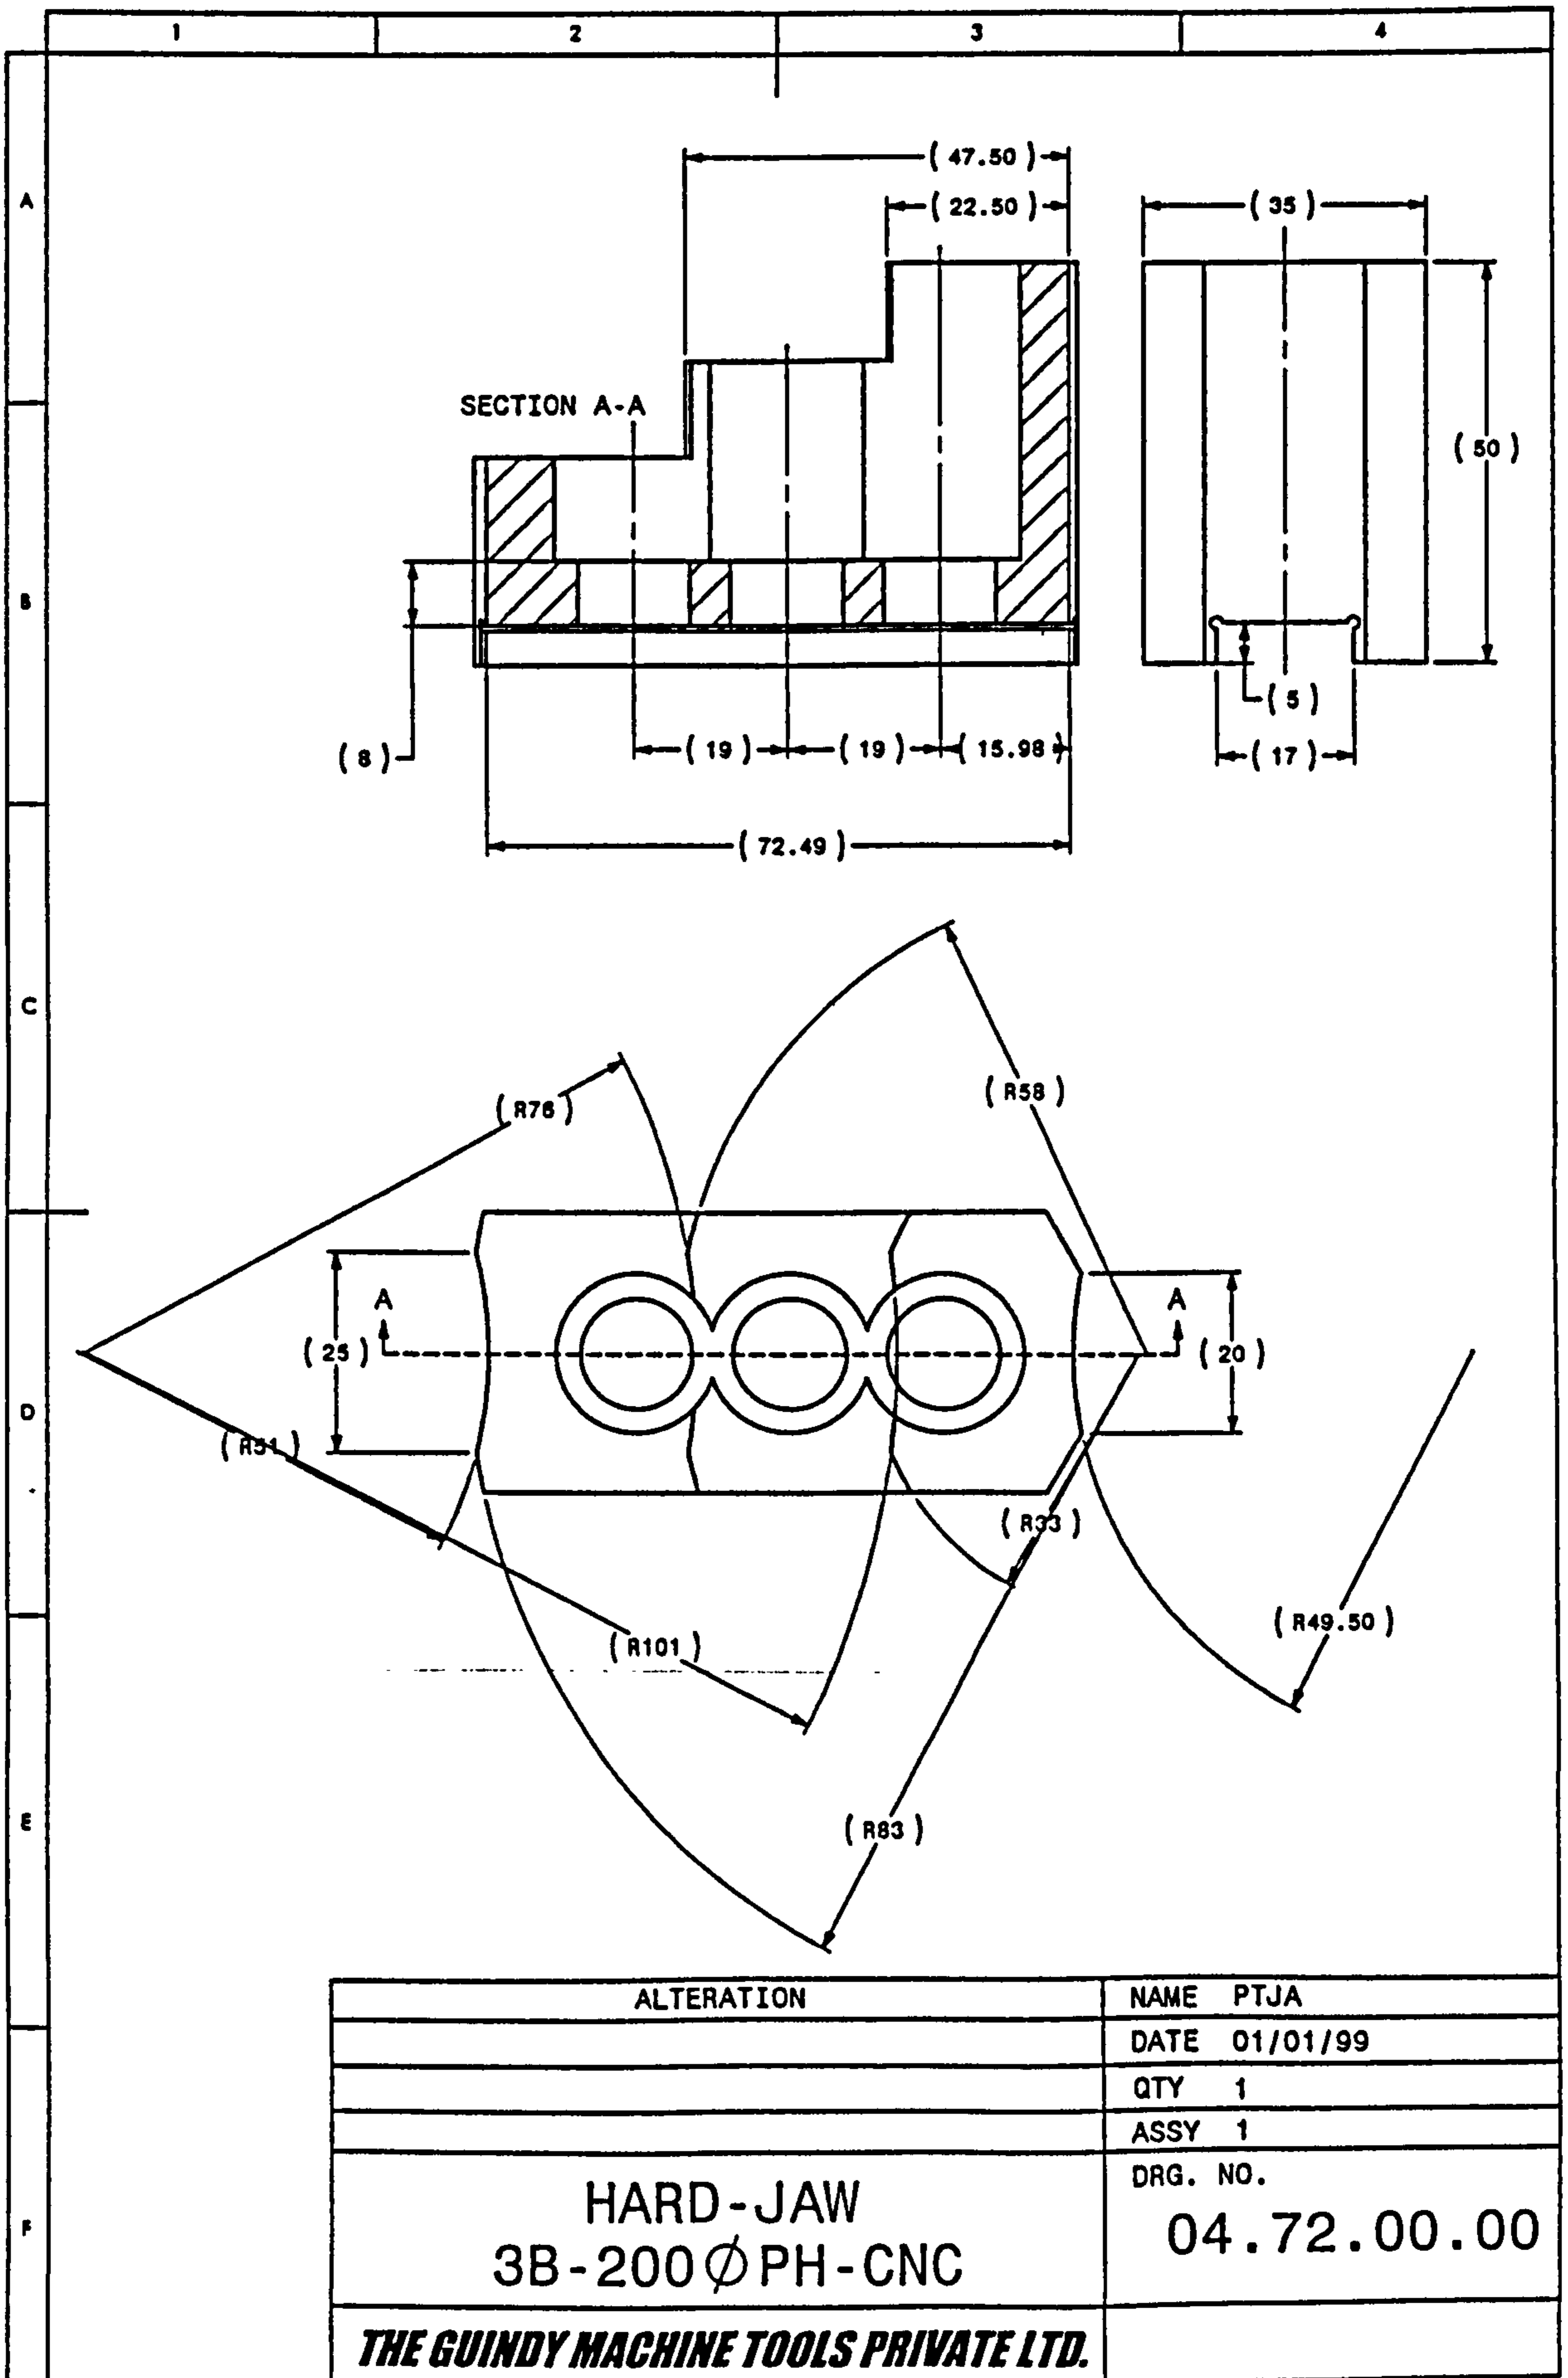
GMT Hard Jaw – Pro/ENGINEER Drawing
